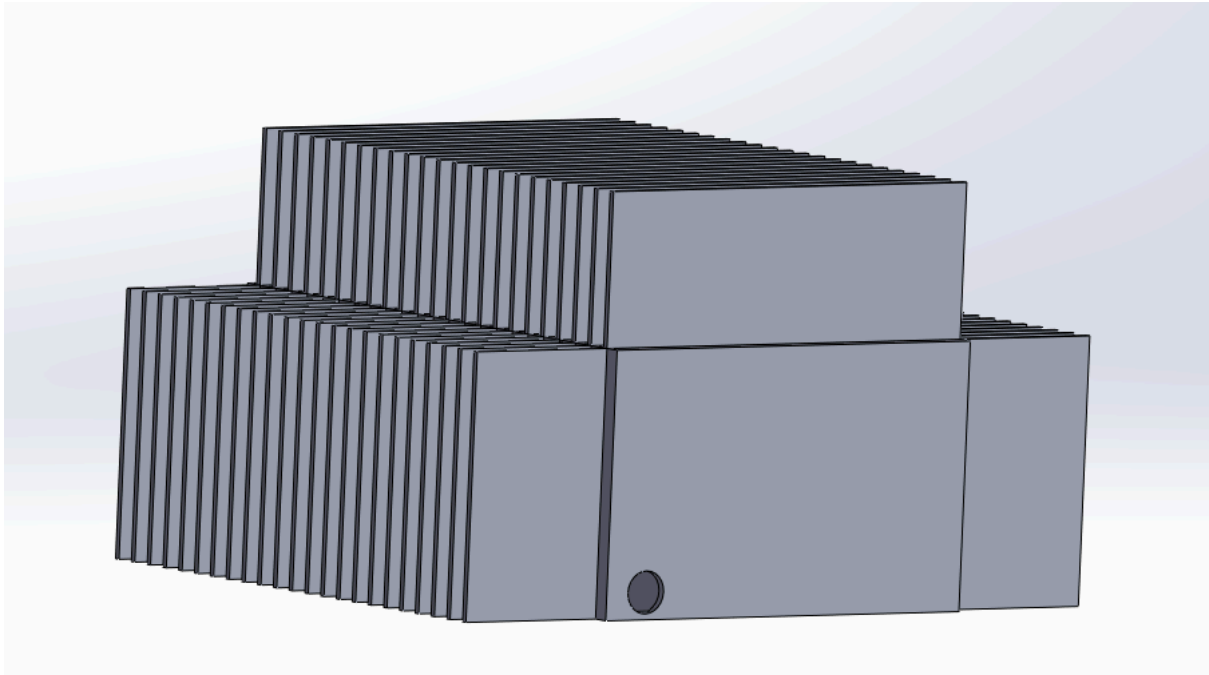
3D view of the side part of the casing and heat sink (a)
